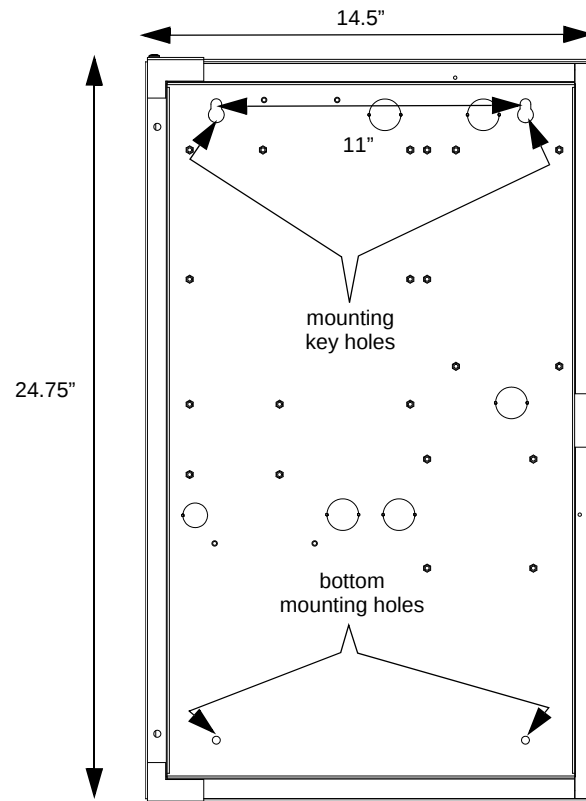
Amplifier Cabinet Flush-Mount Dimensions and Mounting Hole Locations
